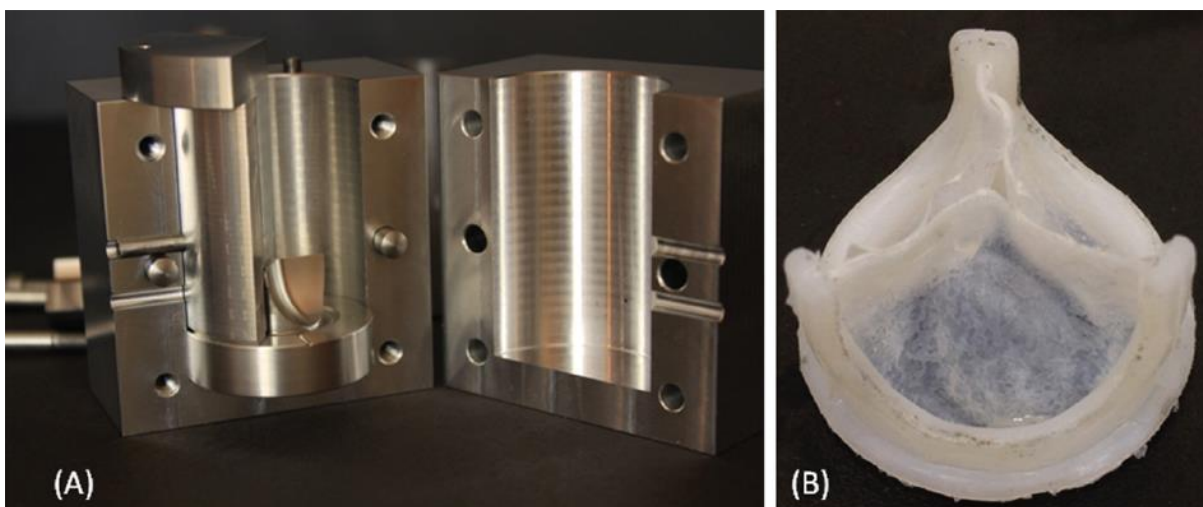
Stony Brook injection mould (left), with valve pictured (right).
